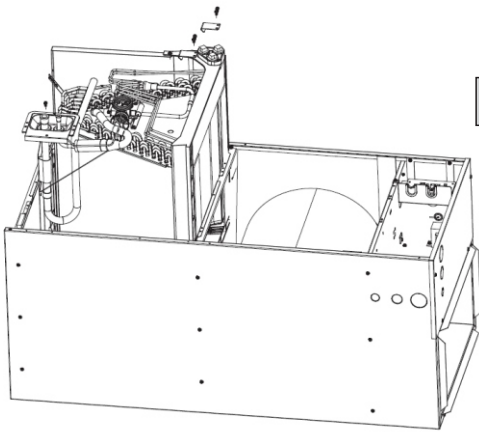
H— Evaporator Assembly Rotated 180° and Reinstalled
